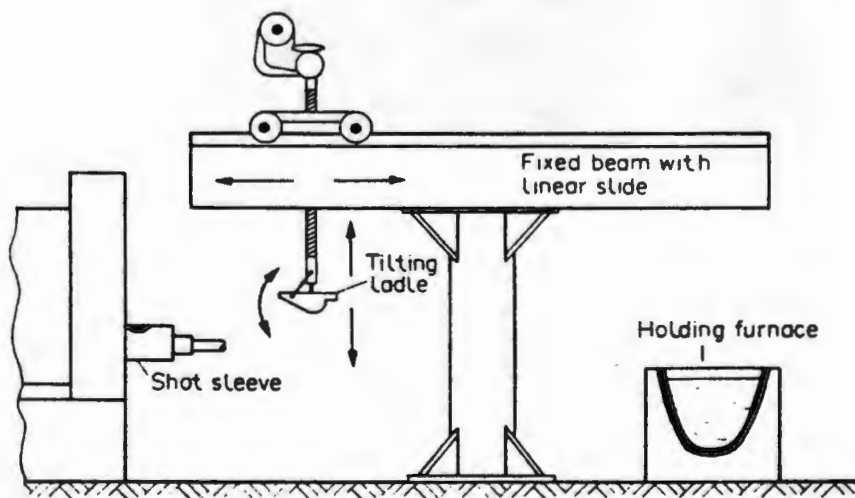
Linear Slide Type Transfer Ladle (Reprinted from [7])
